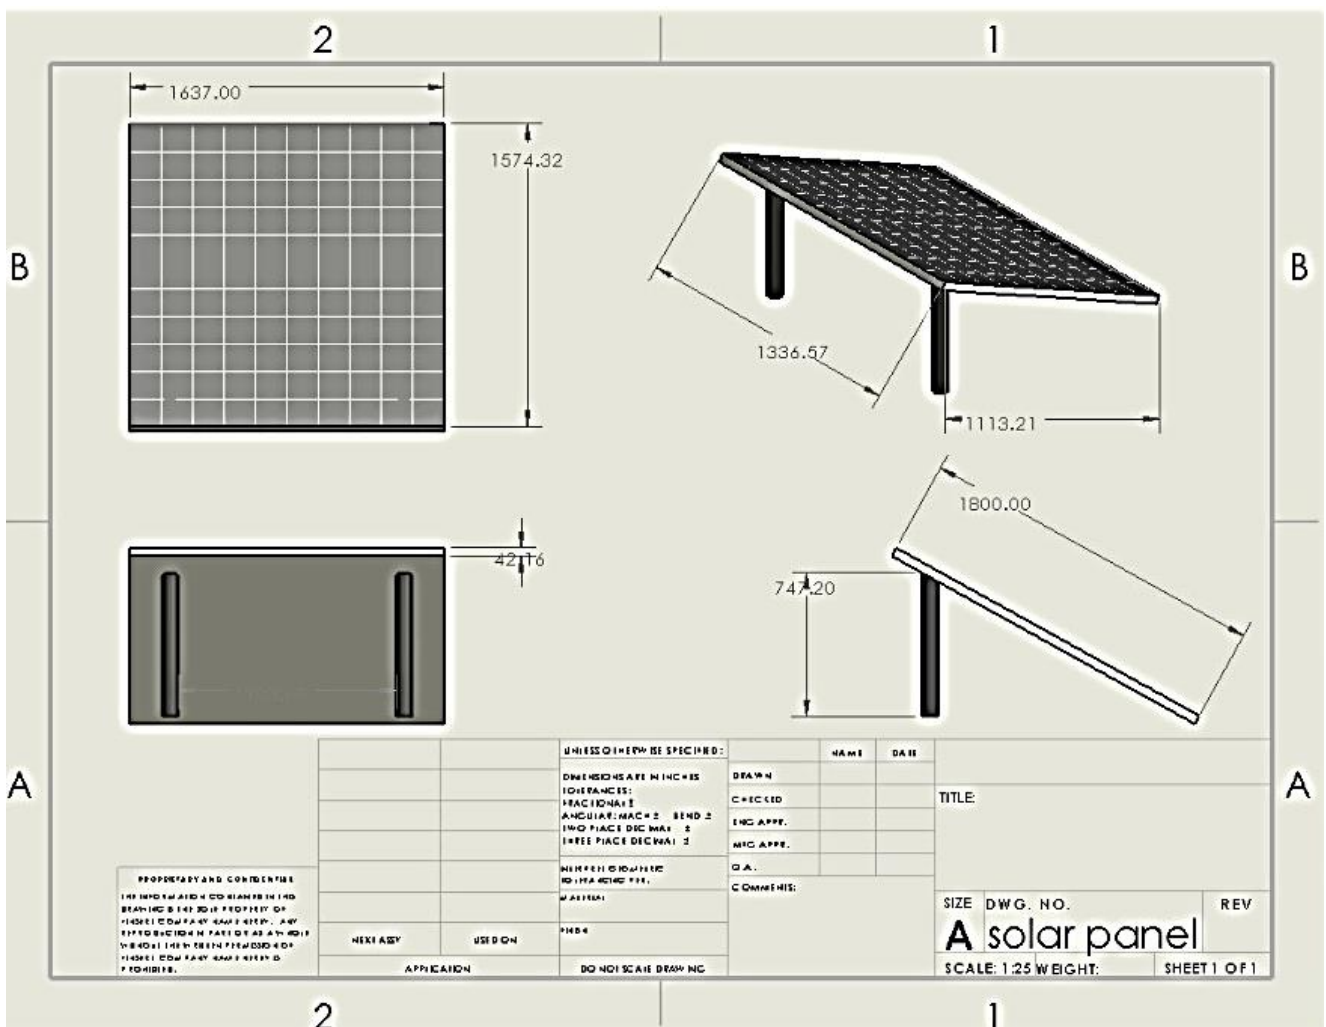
Solar panel drawing with dimensions (mm) (*SolidWorks CAD*)
